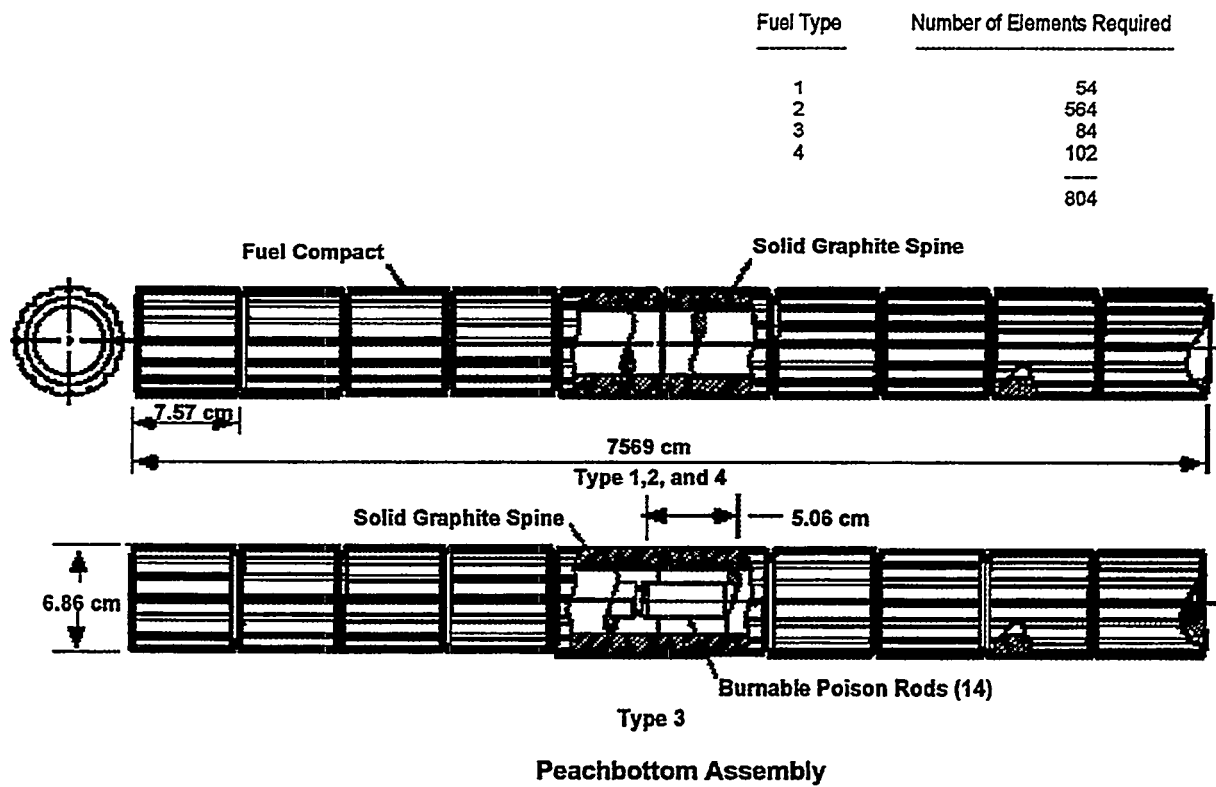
Peach Bottom Unit 1, Core 1 fuel compacts
